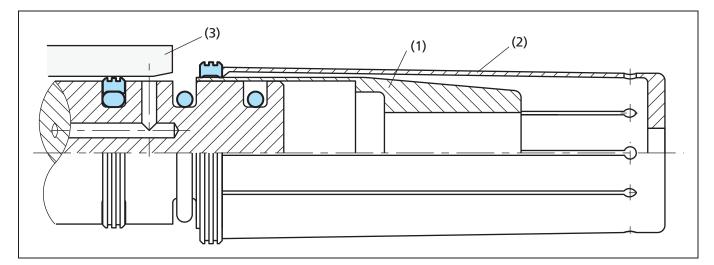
Expanding the Turcon[®] Roto Glyd Ring[®] over the installation sleeve using an expanding sleeve
